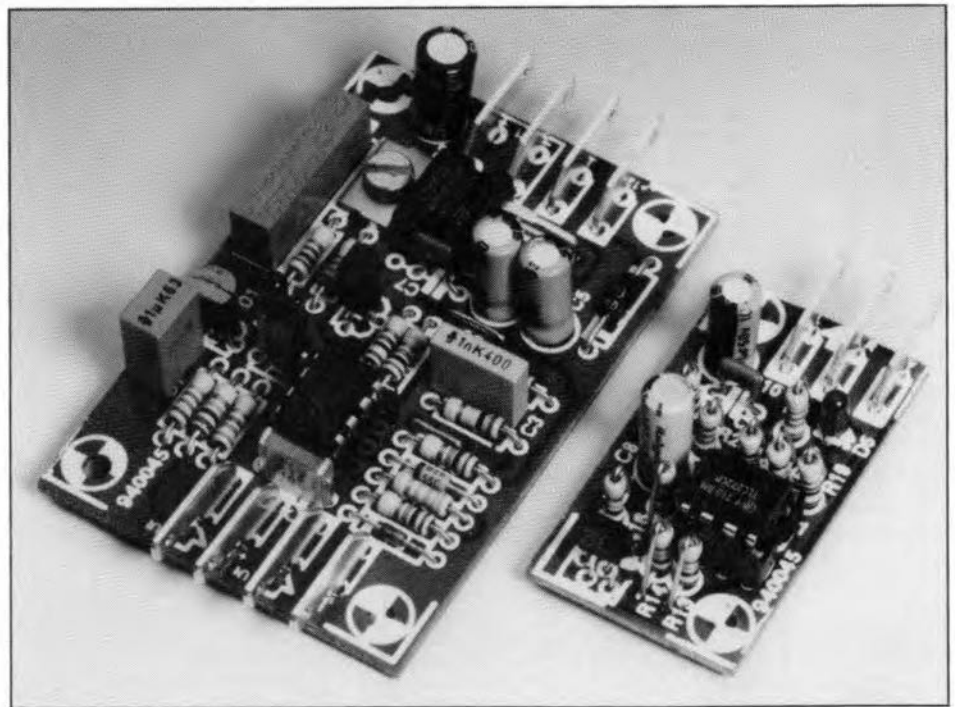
The completed boards clearly show the car-type right-angle terminals.
